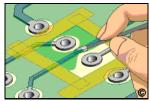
Epoxy can be used to replace damaged coatings and solder mask.
